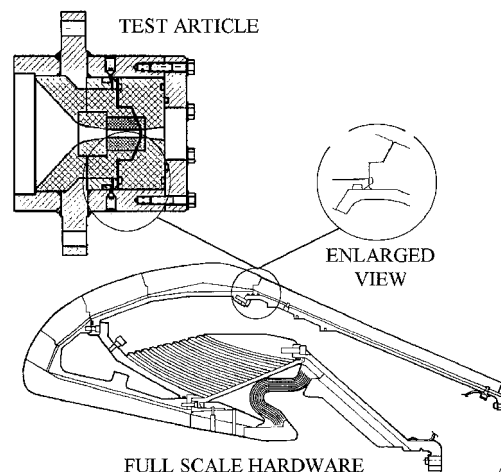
RSRM nozzle joint-4 and hot-flow test fixture.
